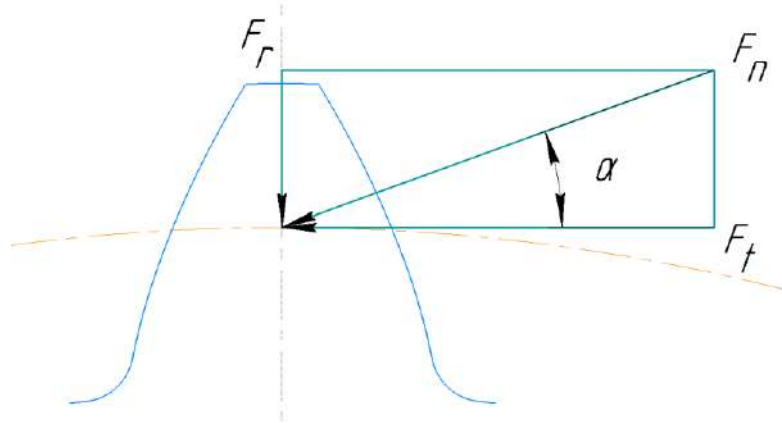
Diagram of the force in the engagement of cylindrical gears
